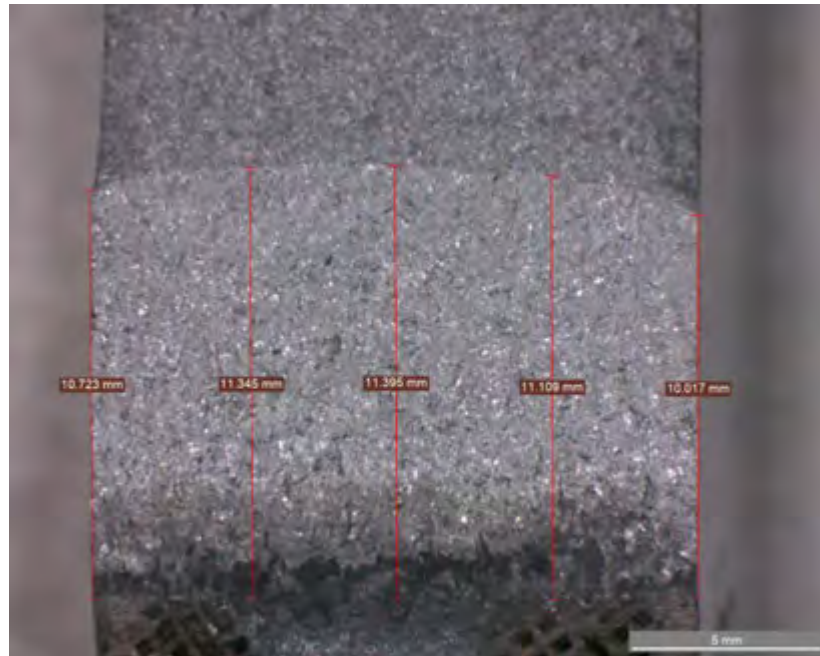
Crack length measurement of fracture surface of specimen EDGE – 2.
